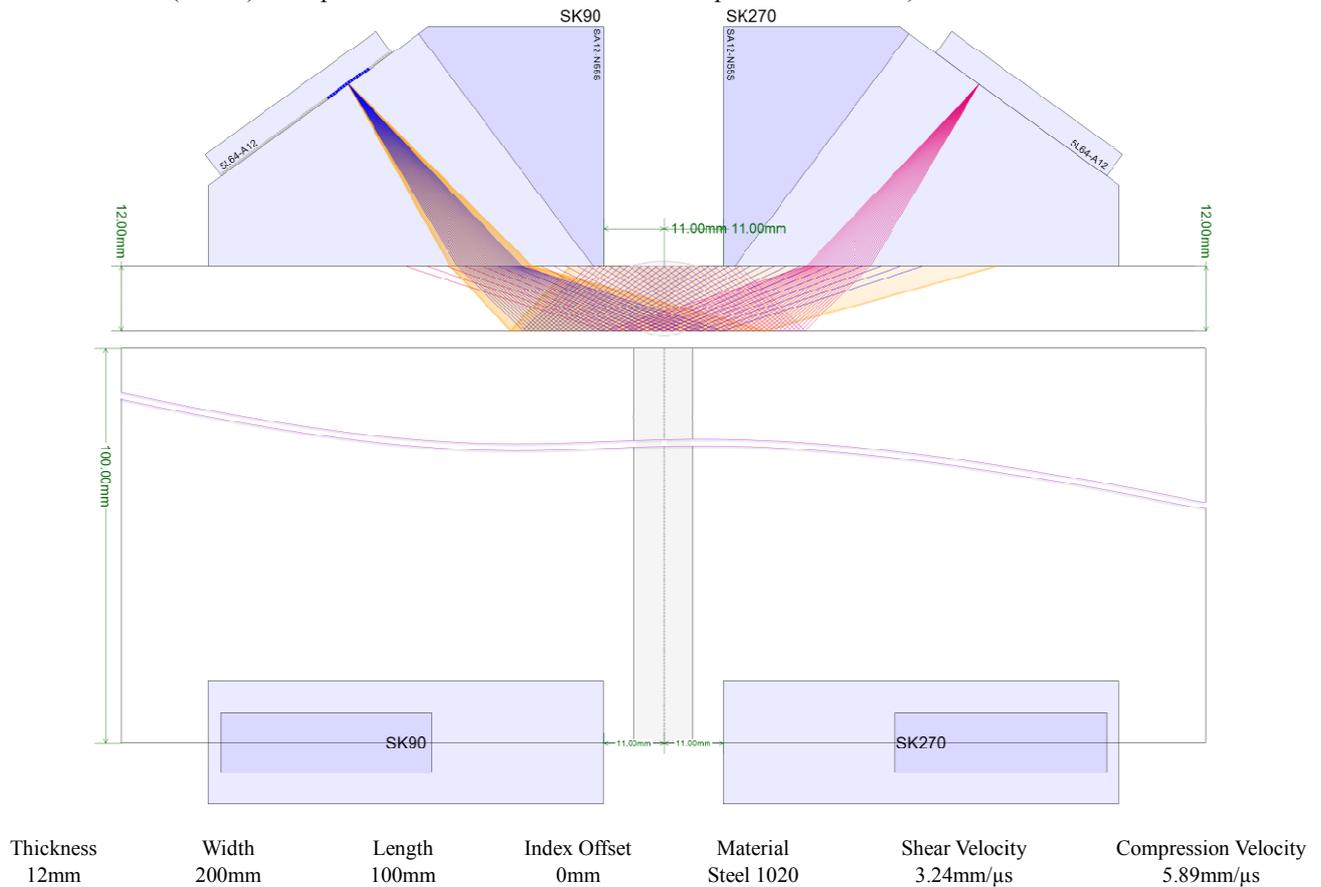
Adjustment of parameters for flaw specimens test on PAUT machine
